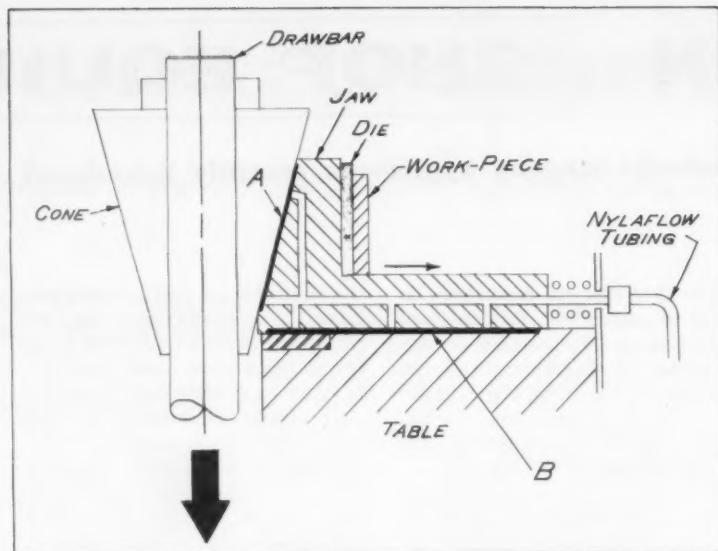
Section through jaw, die, and work of Grotnes expander showing how "Nylaflow" pressure tubing is used to solve difficult lubricating problem
